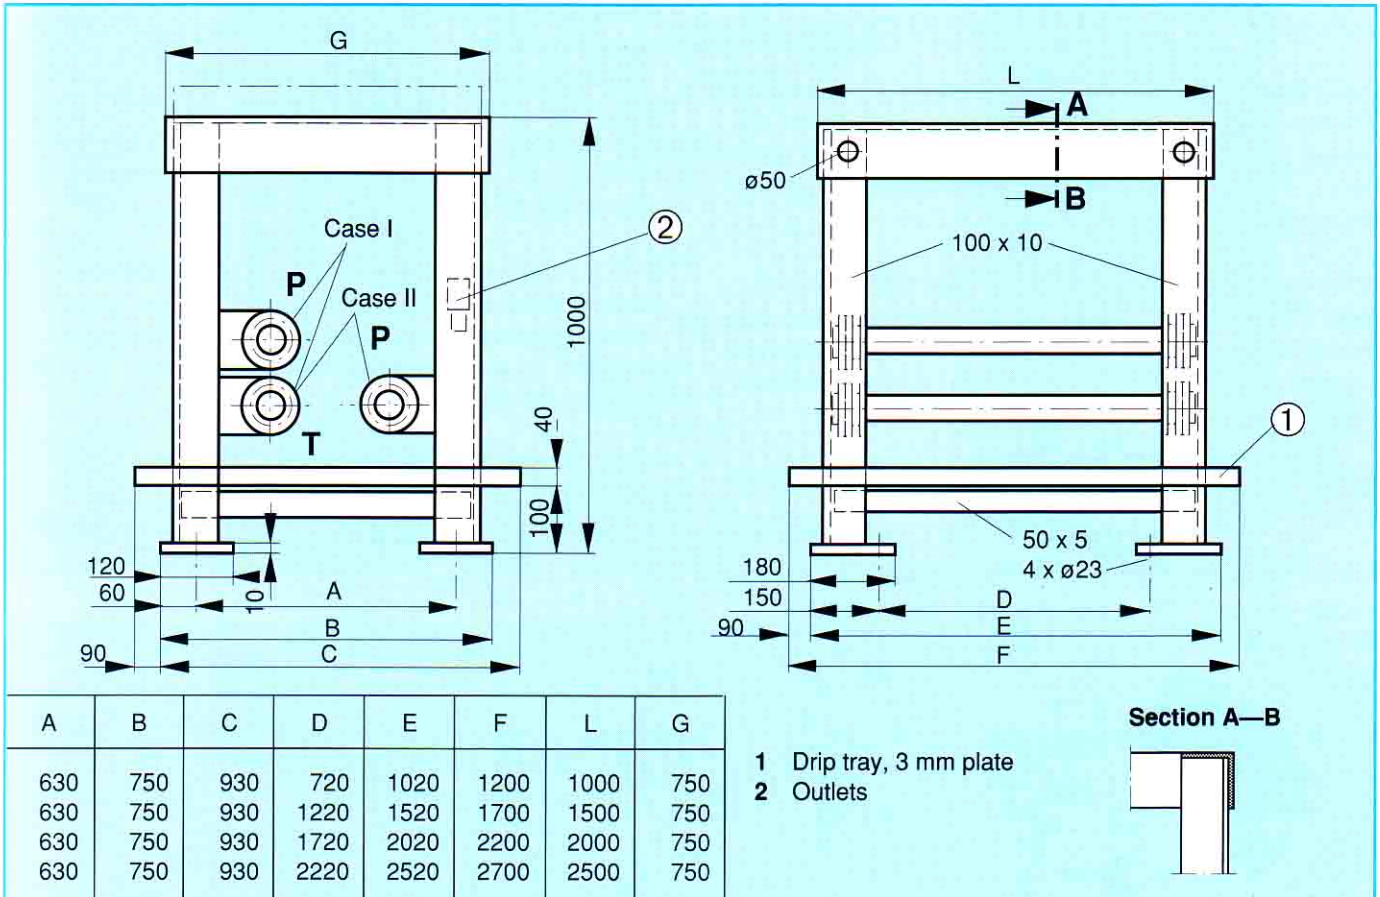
Valve table, lightweight version, for mounting single valves up to Size 22 and control plates up to Size 16
